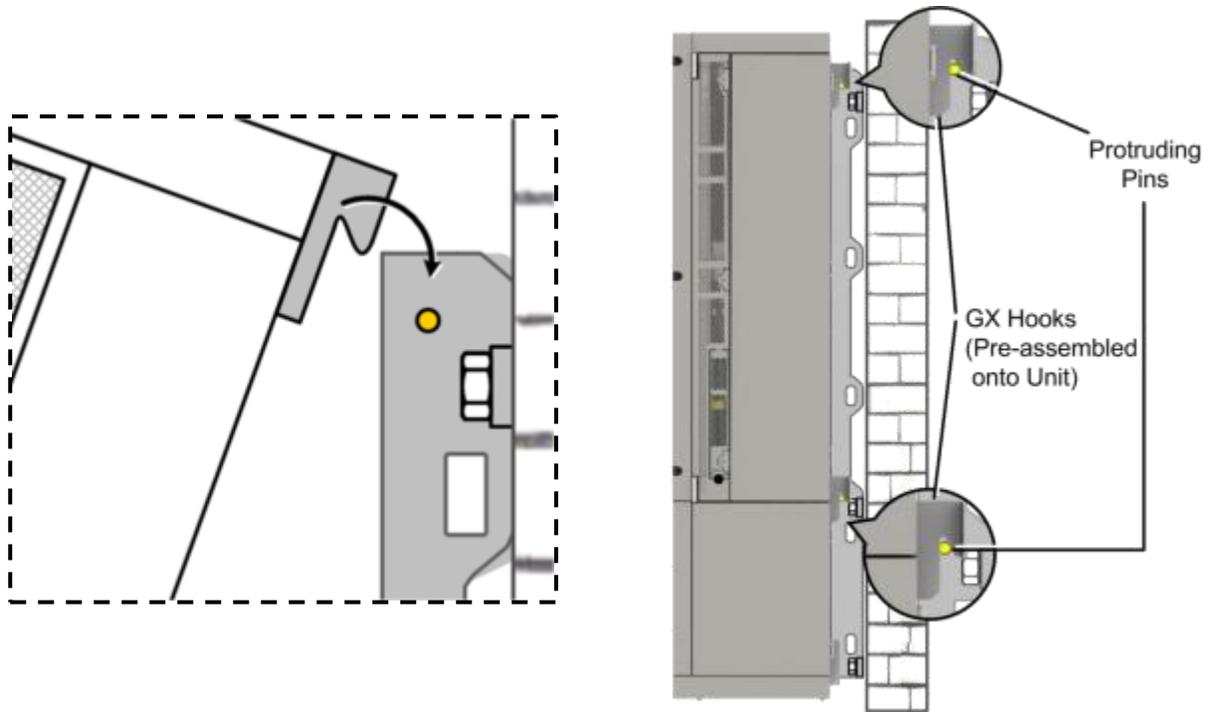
Mounting Procedure and Zoom-in of Hung Unit
